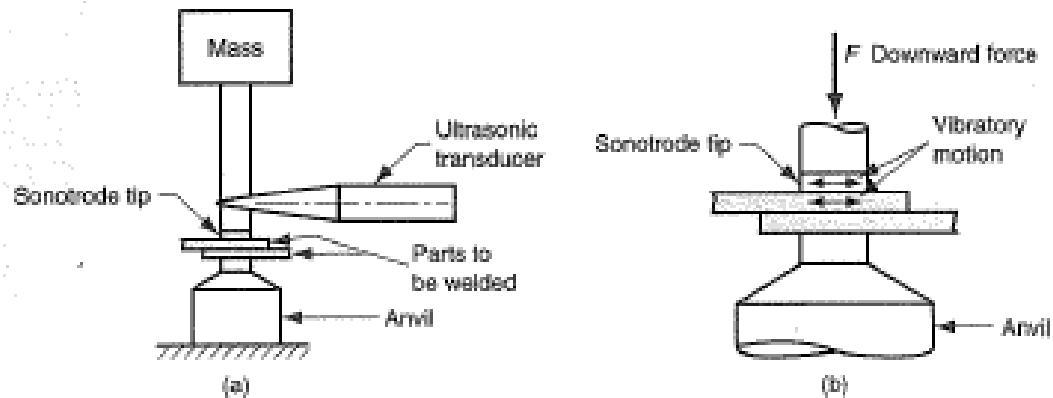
Ultrasonic welding (USW): (a) general setup for a lap joint; and (b) close-up of weld area.
